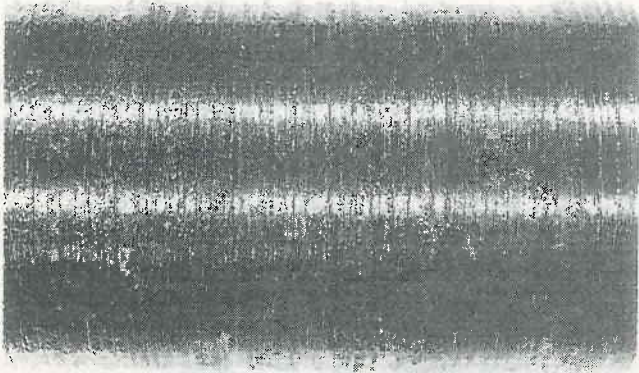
Outer surface of tube specimen. Hot air blown with preheating the incoming tow and mandrel.
